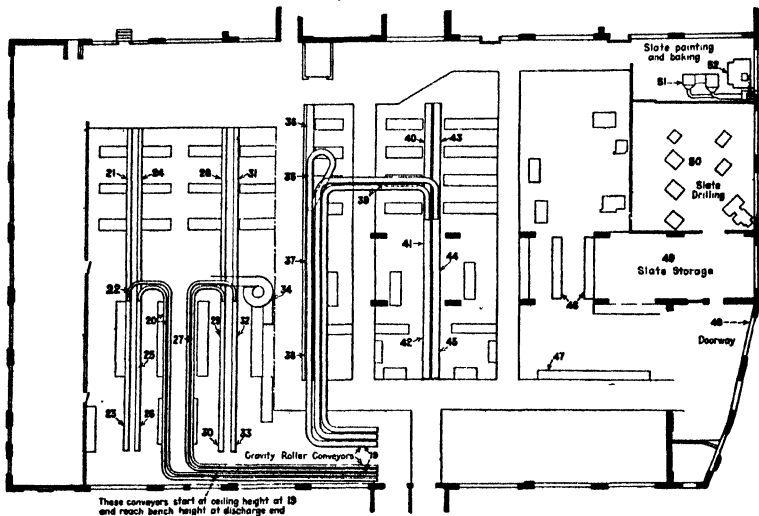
Layout of conveyors and equipment on first floor, where panel and switch box assembling are completed.
